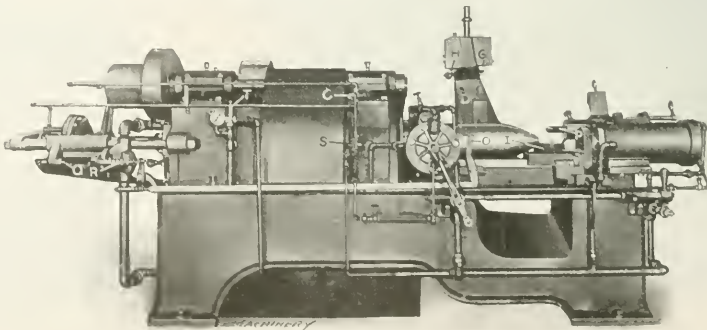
Front View of Machine with Tool Carrier Lifted to throw Tools out of Contact with Work
